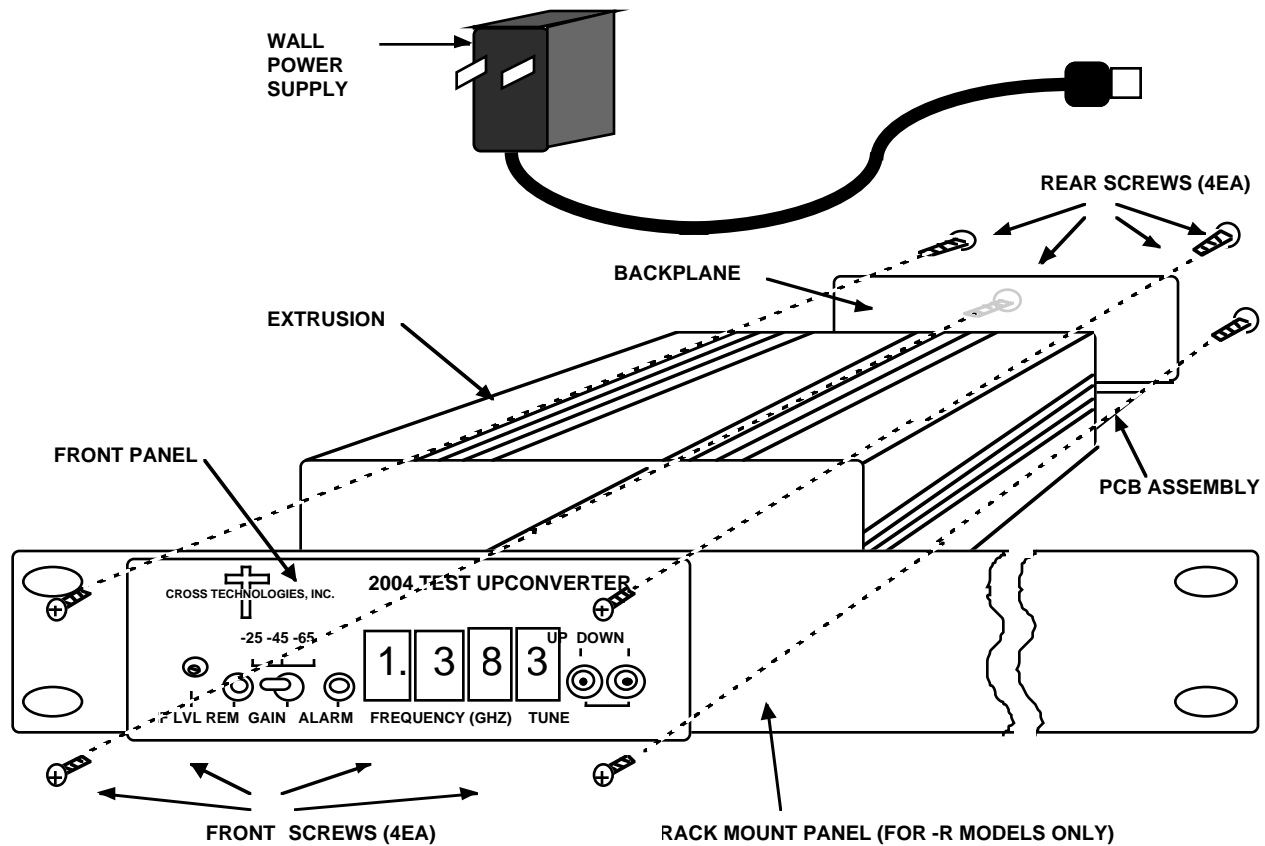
SERIES 2000 ASSEMBLY DRAWING
